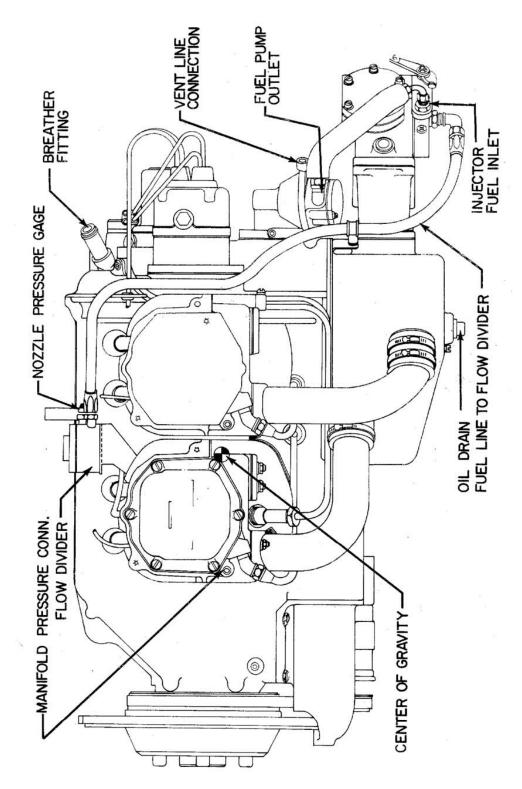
Installation Drawing – Left Side View – Typical IO-320-B Series
